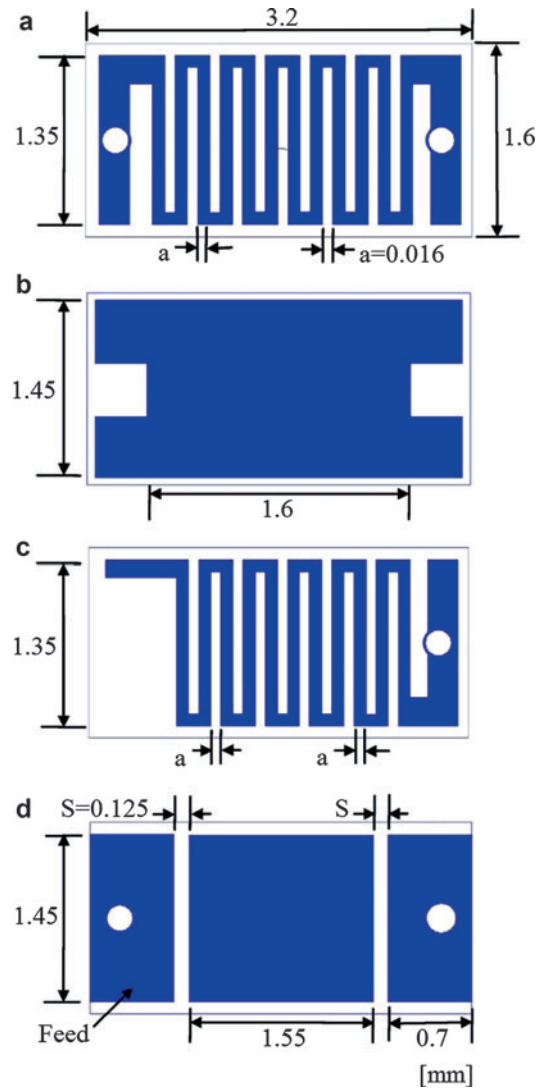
Exploded view of the folded meander-line chip monopole antenna (a) the top view, (b) the second layer, (c) the third layer and (d) the bottom layer © IEEE 2015
